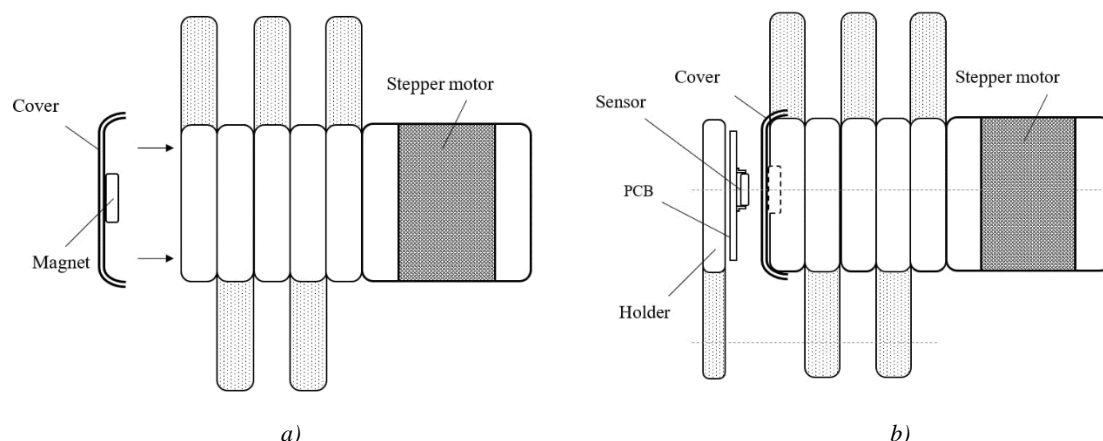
Principle of attachment of the magnet to the manipulator joint (a); drawing of the reading module attachment variant (b)
